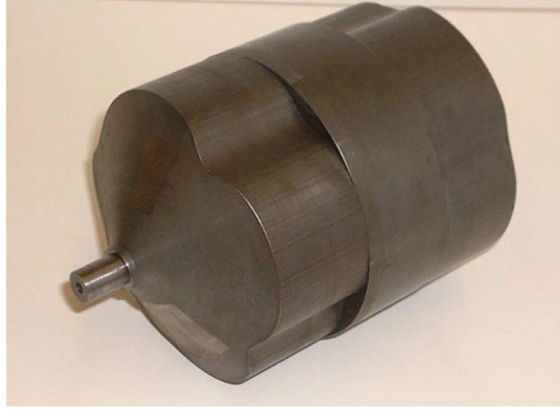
30 kW, 100,000 rpm homopolar machine rotor [17]
